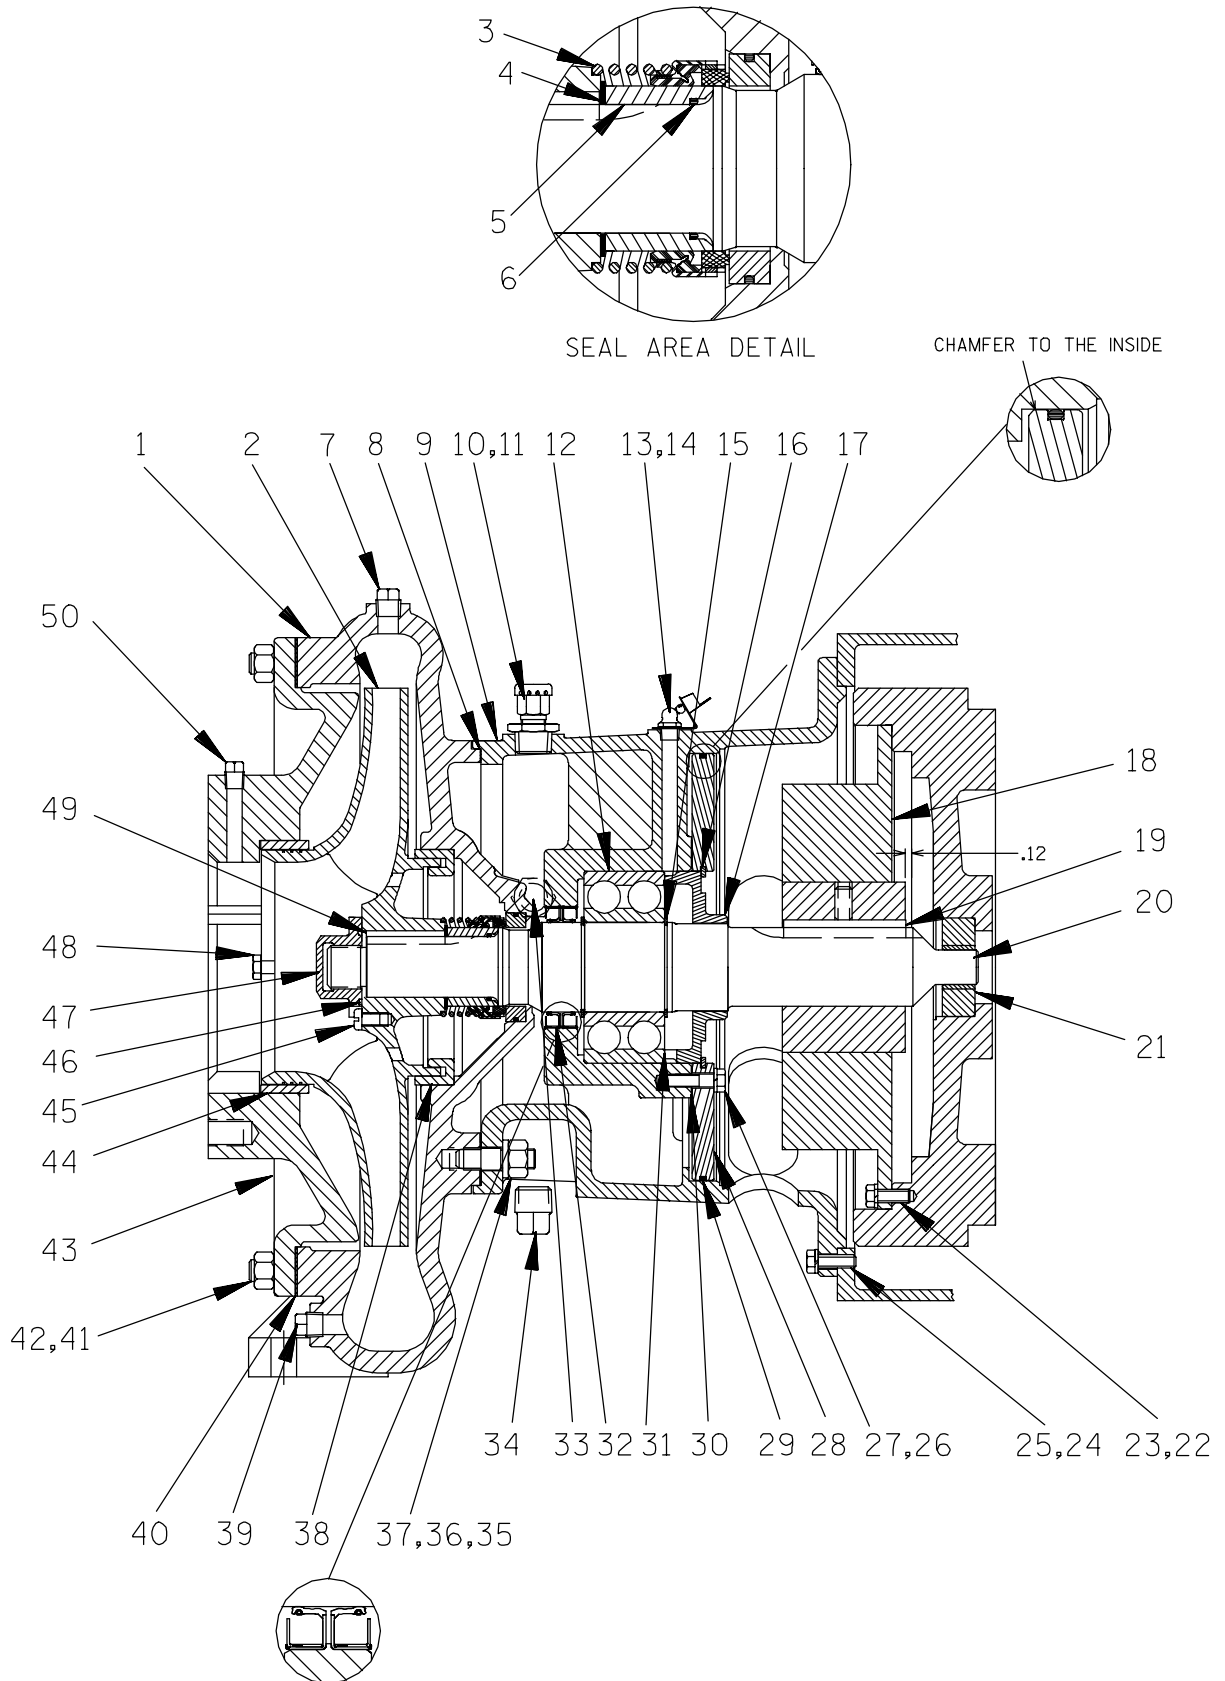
66B60-(SAE 3/11.5) Pump Assembly
